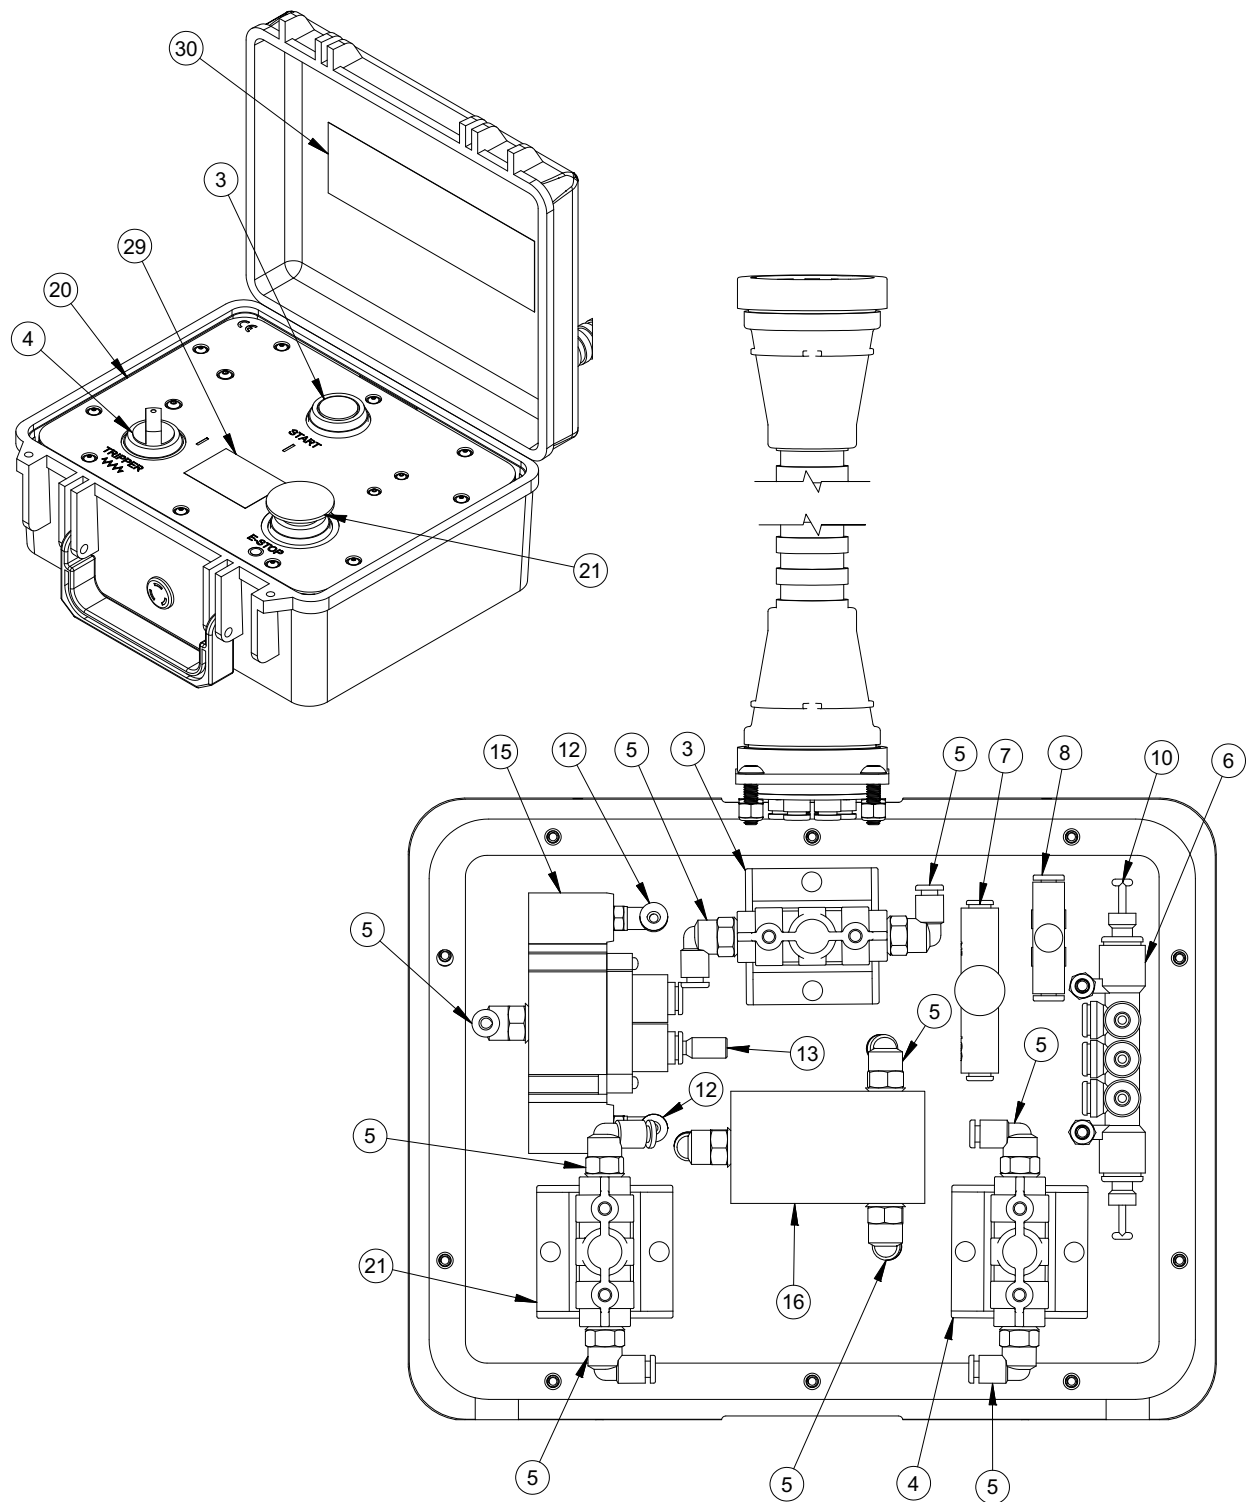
DEFENDER™ OPERATOR PENDANT ASSEMBLY 1 (P/N 96374)
